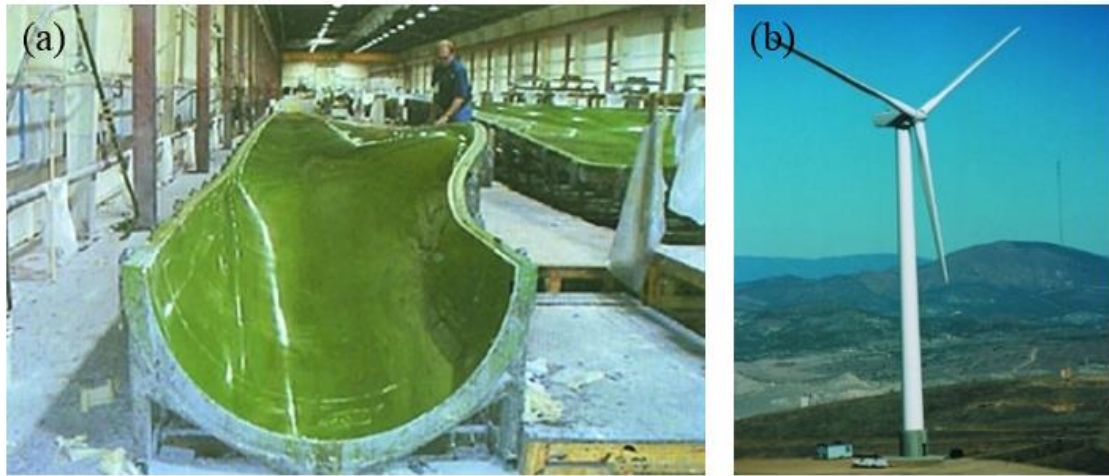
VARTM manufactured parts (a) wind blade motor (b) wind blade [9]
